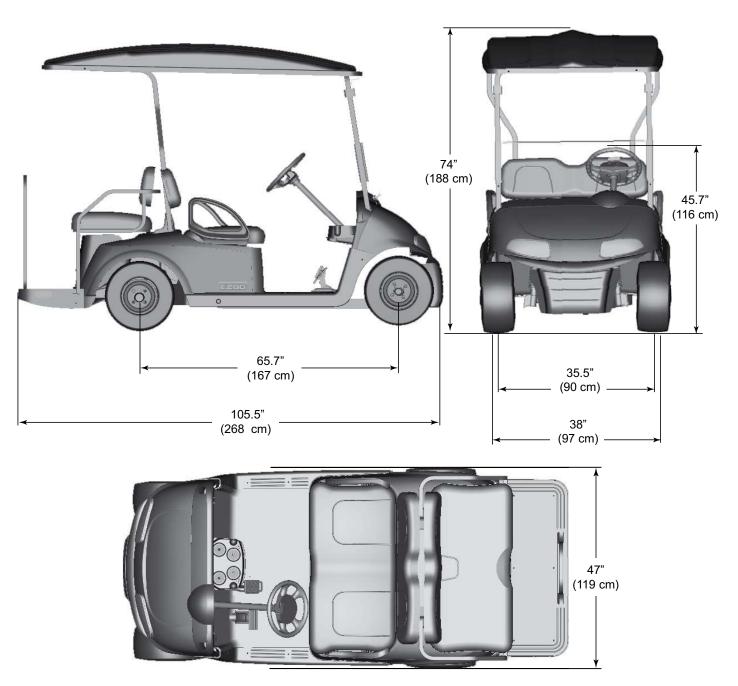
Shuttle 2 + 2 Vehicle Dimensions
